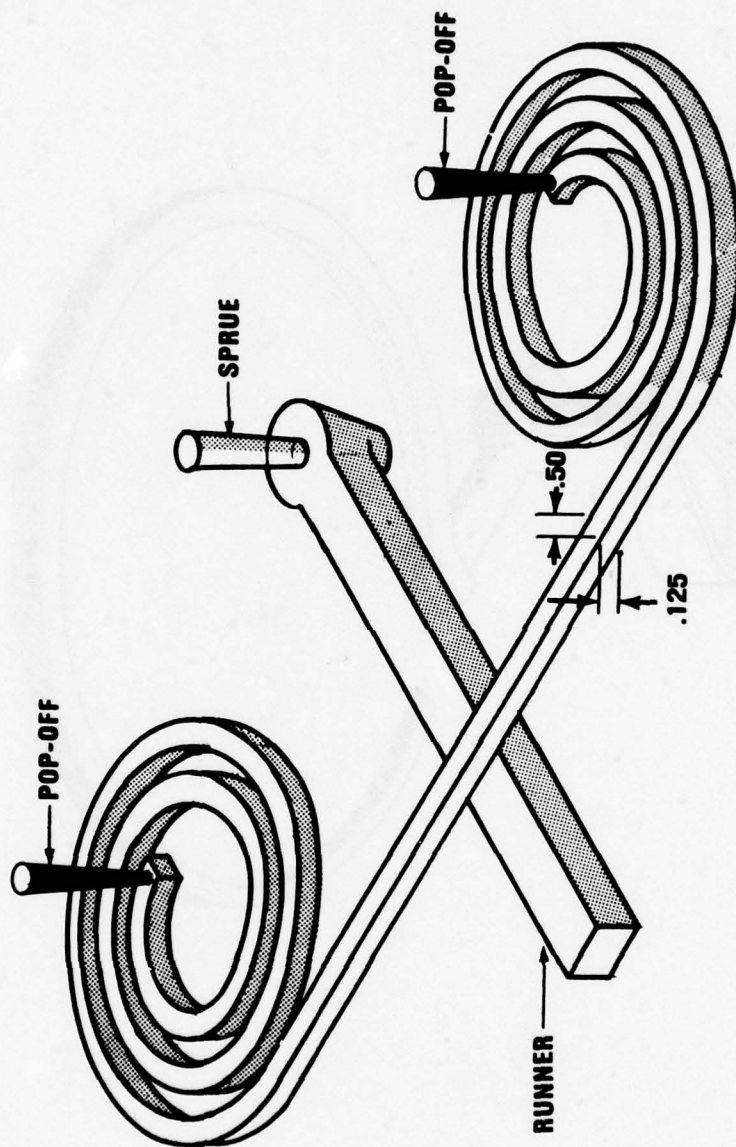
SPIRAL CASTING FOR FLUIDITY TESTING OF A357
